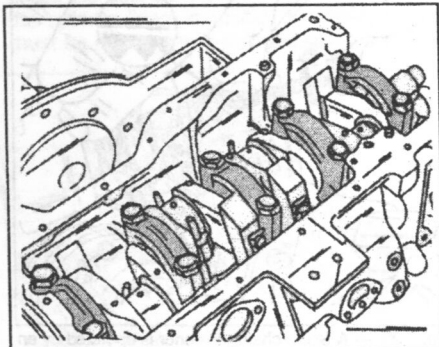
The crankshaft main bearing caps must be checked for identification marks before they are removed.
